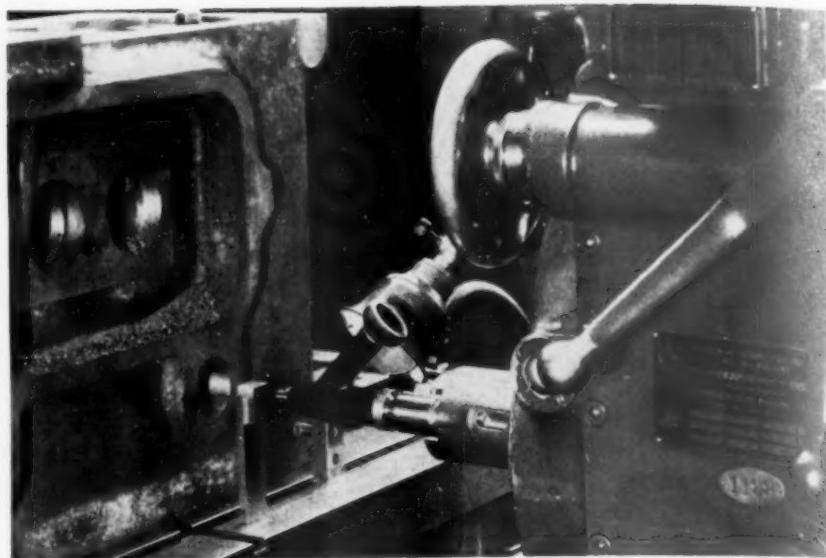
Setting spindle of horizontal boring bar a specified distance above boring machine table.
